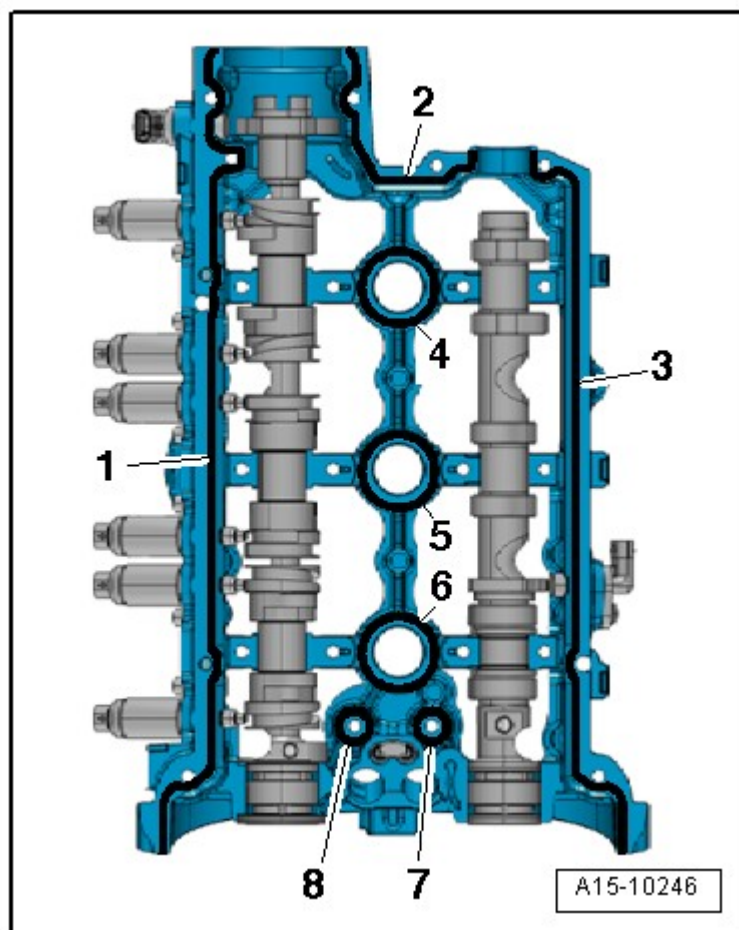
Applying Sealant Beads -4 Through 8- To Clean Sealing Surfaces On Guide Frame
